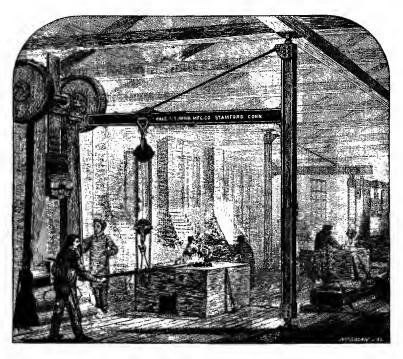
Light Jib Crane, with Trolley and Pulley Block.
